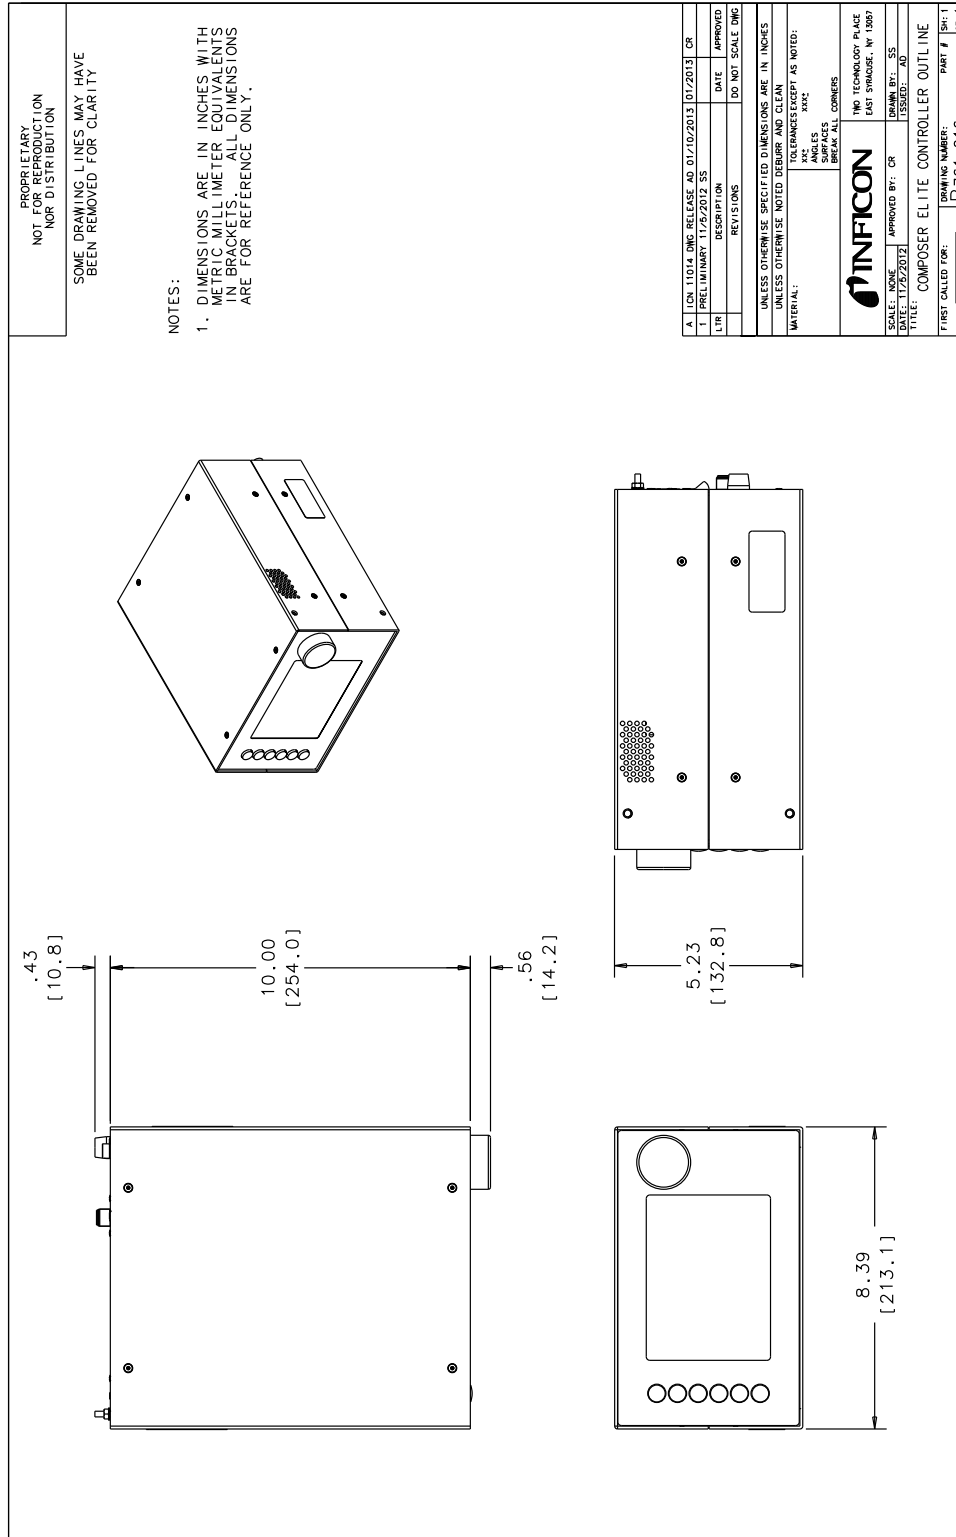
761-016-1-out/ Composer Elite Controller Outline
